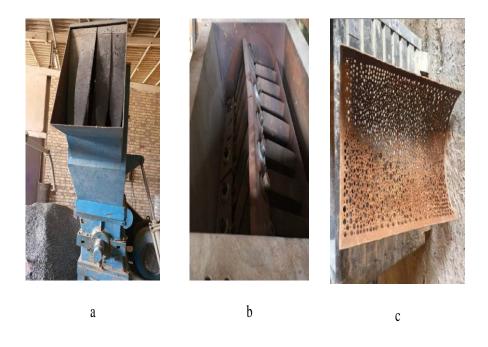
Main Parts of Machine. a-Door, b-Sharp Fan, c-Filter.
